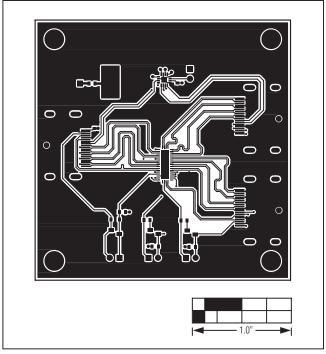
MAX14998 EV Kit PCB Layout—Component Side
